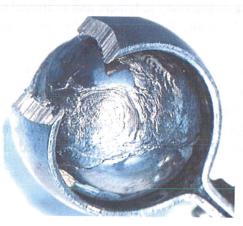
Damaged ball from 01-05270 aft hanger bearing.
